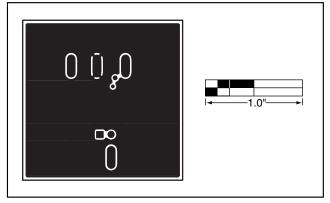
MAX2754 EV Kit PC Board Layout—Ground Plane 2
